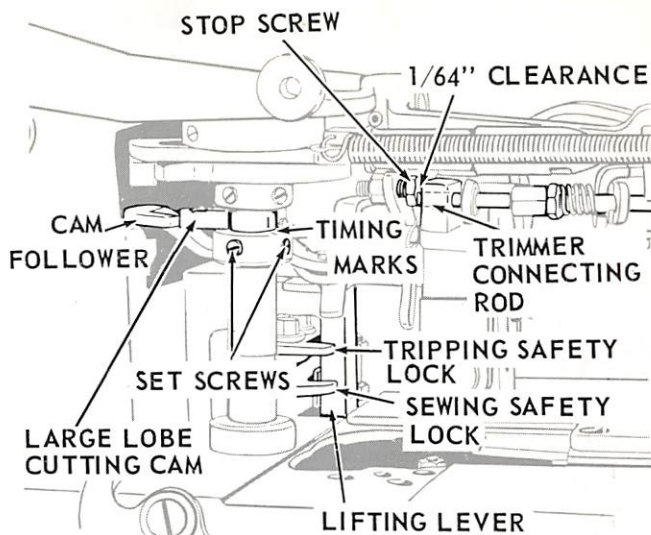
Cam Follower Actuated Fully by Cutting Cam
